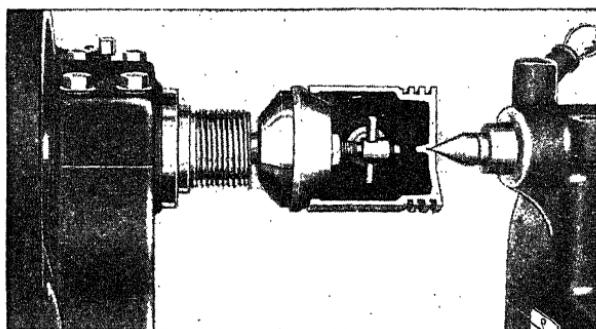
Method of Set-Up for Turning Pistons in Lathe
